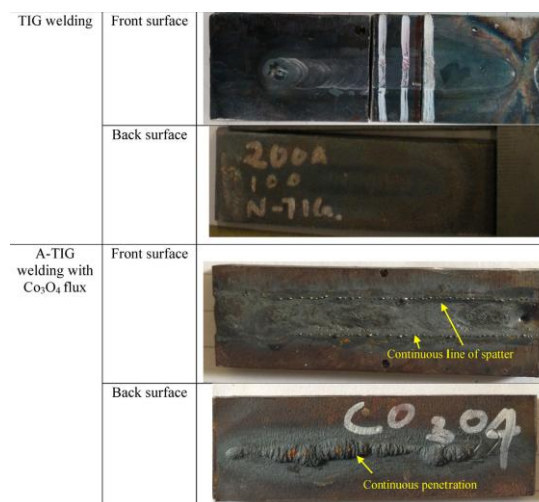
Surface appearance of welded plates. ^[10]
